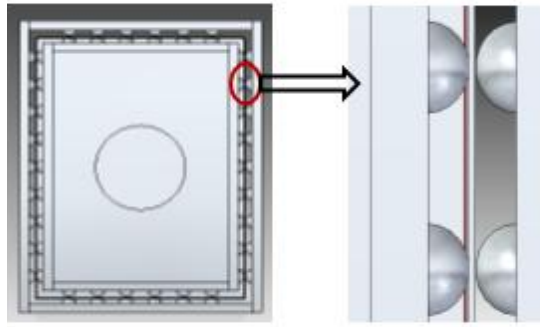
Simply supported boundary condition fixture and detail view of balls in point
